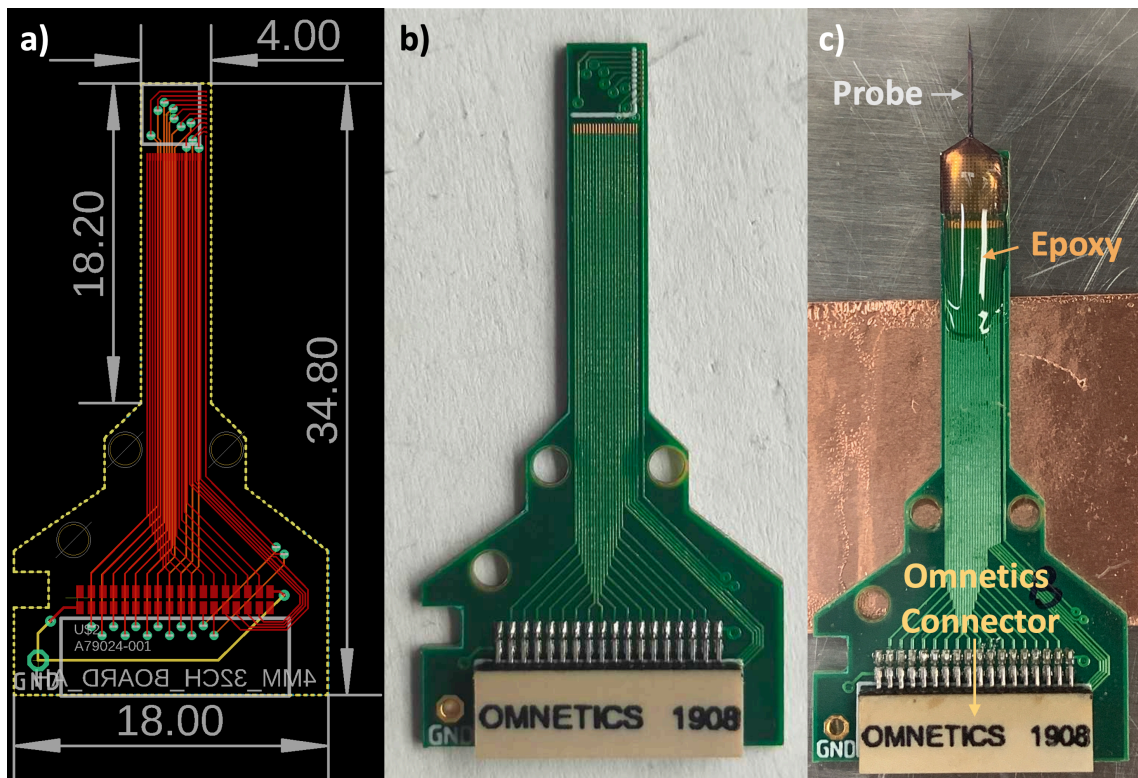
32-channel passive PCB connecting neural probe. a) Dimensions listed in mm of 32-channel acute PCB. b) Acute 32-channel PCB board. c) Acute board with rodent neural probe mounted to PCB. Neural probe is electrically connected to PCB via wire bonds and encapsulated with epoxy (clear brown).
